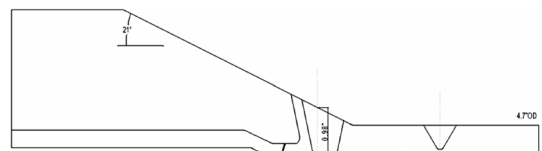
Example of dissimilar metal weld position located near the transition from flat surface to tapered surface
